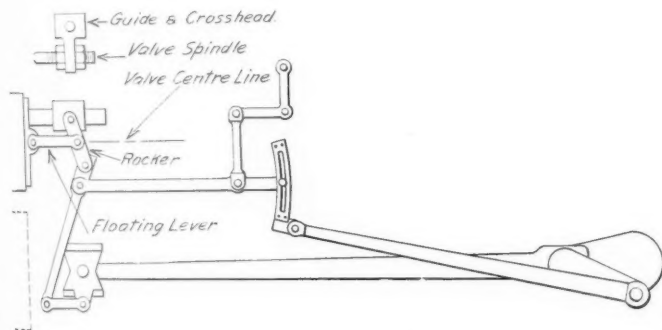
Valve Gear as Applied to Etat 4-6-0 Type
